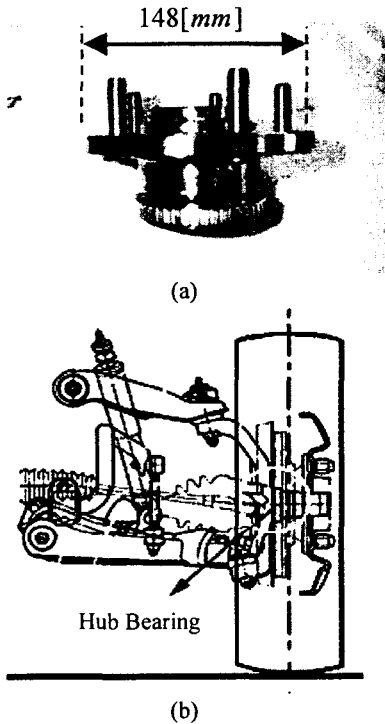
Hub bearing (a) A double-row angular contact ball bearing, (b) Structure of a rear suspension system with a hub bearing and wheel
